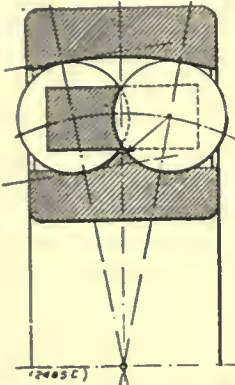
SECTION THROUGH HALF OF RADIAL BEARING.
